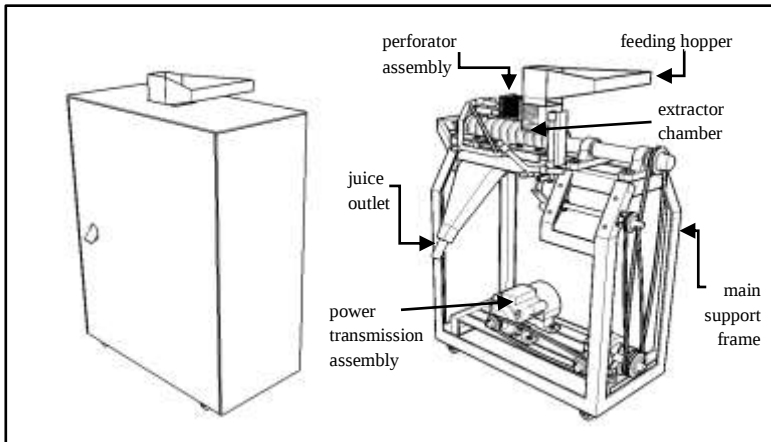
The isometric view of the Calamansi Juice Extractor with housing (a), and isometric assembly drawing of the Calamansi Juice Extractor without the housing, showing the internal components and their relative arrangement, and showing the major components (b)
